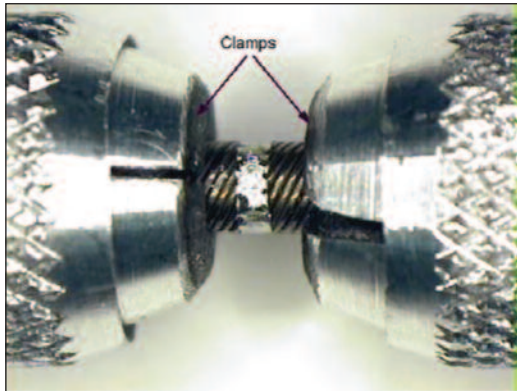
Positioning of the part clamps adjacent to the weld area ensures minimal coil movement during welding.
